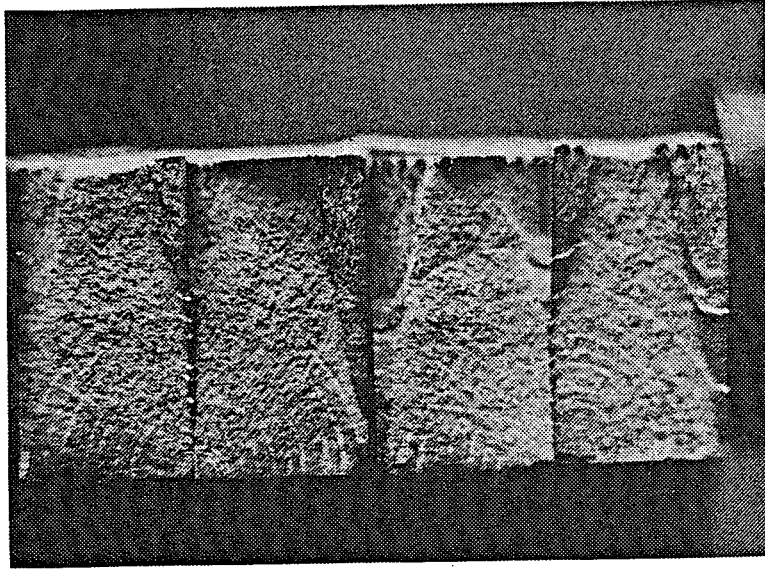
Marker load indications on the fracture surfaces of specimen No. 13 . (load history of type III)
